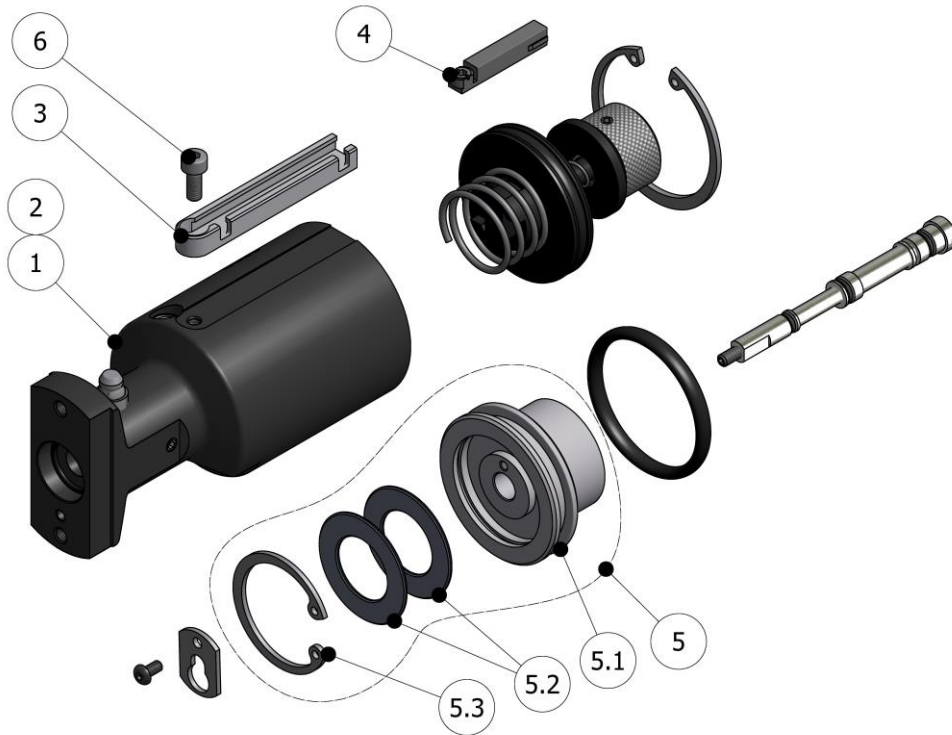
(OPTIONAL) Magnetic Switch Assembly, Exploded View
